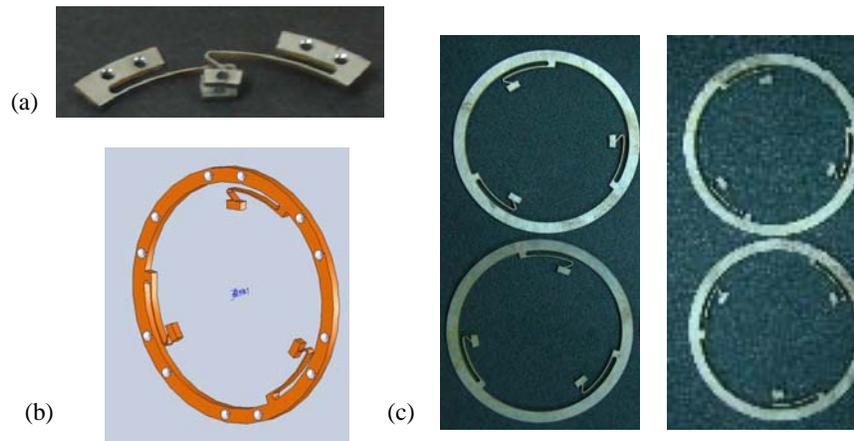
(a) A pair of spring steel compliant segments soldered together. This pair is the main element of the compliant radially expanding mechanism, (b) solid model of a ring with three compliant segments, and (c) four spring steel rings that help create two clamping ring upon soldering of two rings at the interior clamping points.
